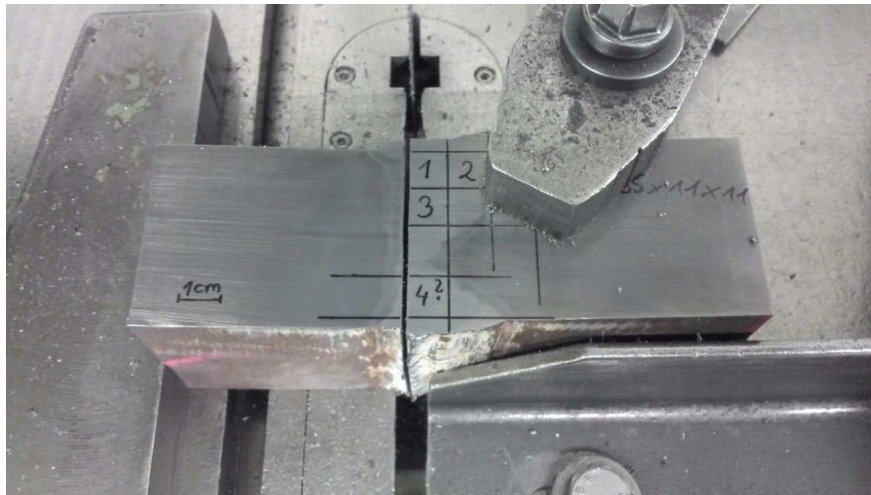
Extraction for of blanks for milling B5x25 samples from the working sample of the nozzle weld joint, dvIV.
